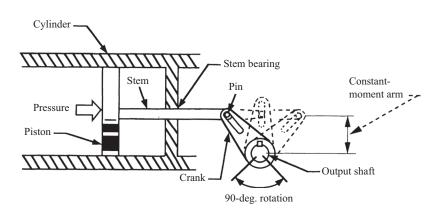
Scotch-yoke connection of piston actuator to rotary valve.
